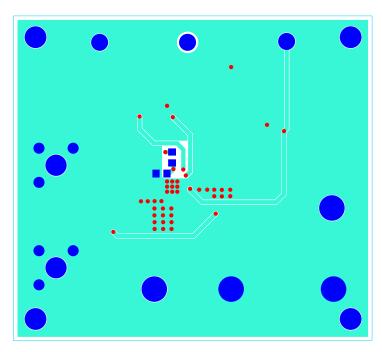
BOTTOM LAYER ETCH (MIRROR)
